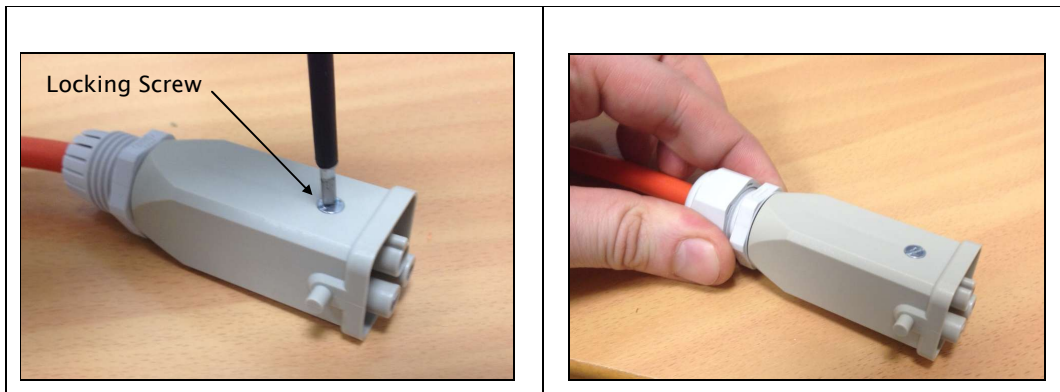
Harting Han® Q2/0 connector – fully assembled
